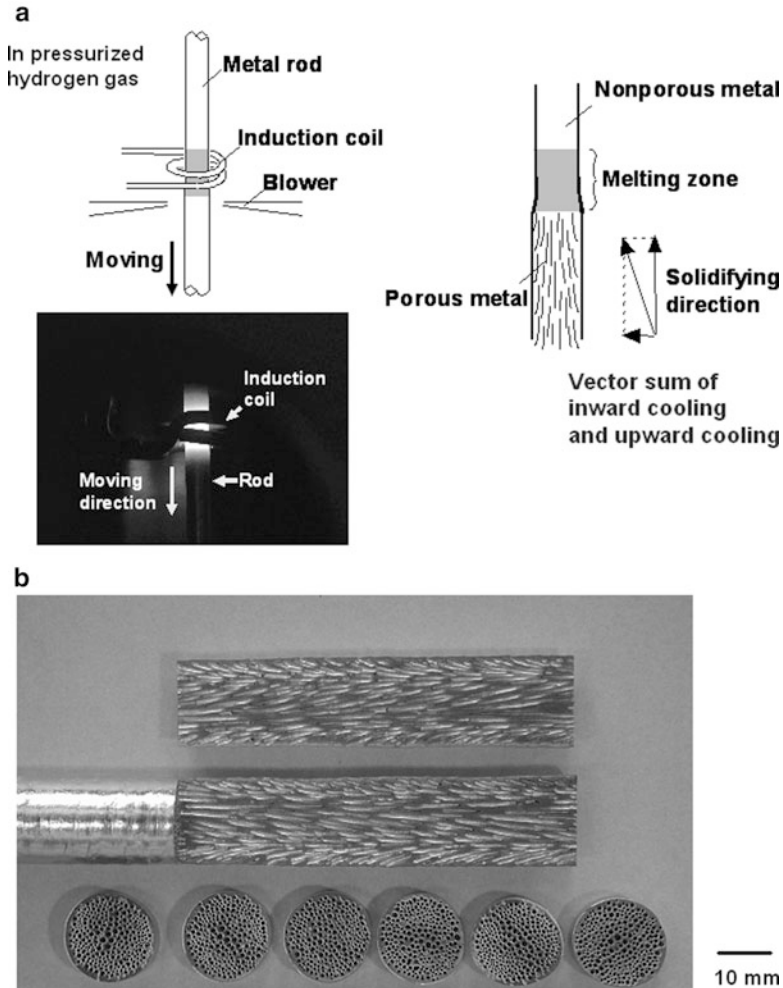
(a) Schematic drawings and a photograph of the overview for the melting part of continuous zone melting technique. (b) Rod and sections of lotus stainless steel fabricated by the continuous zone melting technique in 2.0 MPa hydrogen atmosphere. The transference velocity of the rod is $330 \mu\text{m}^{-1}$. Resulting porosity and average pore size are 40% and $320 \mu\text{m}$, respectively, both of which are almost uniform in the whole part of the ingot. Reproduced from Nakajima H 2007 Fabrication, properties and application of porous metals with directional pores. *Prog. Mater. Sci.* 52, 1091–1173, with permission from Elsevier
